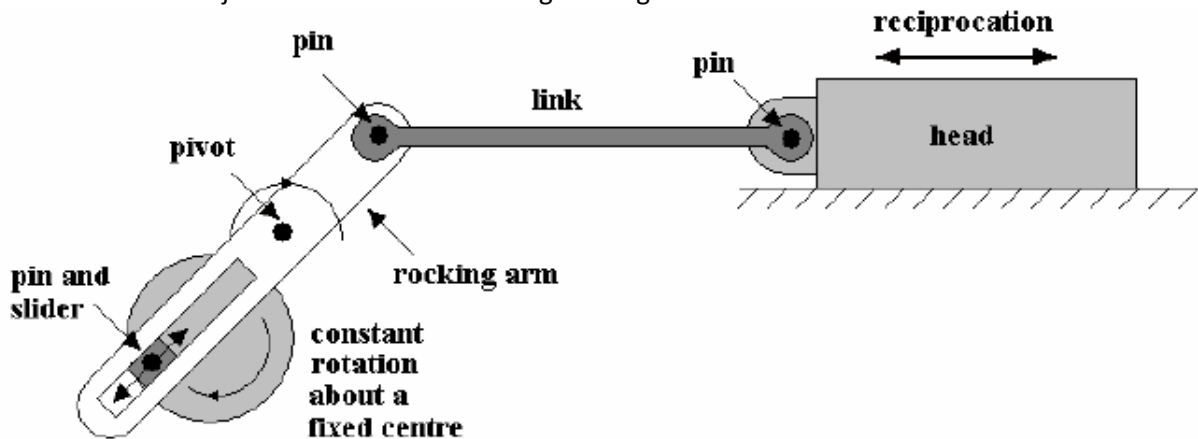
Mechanism used in shaping machines and also known as the Whitworth quick-return mechanism.
